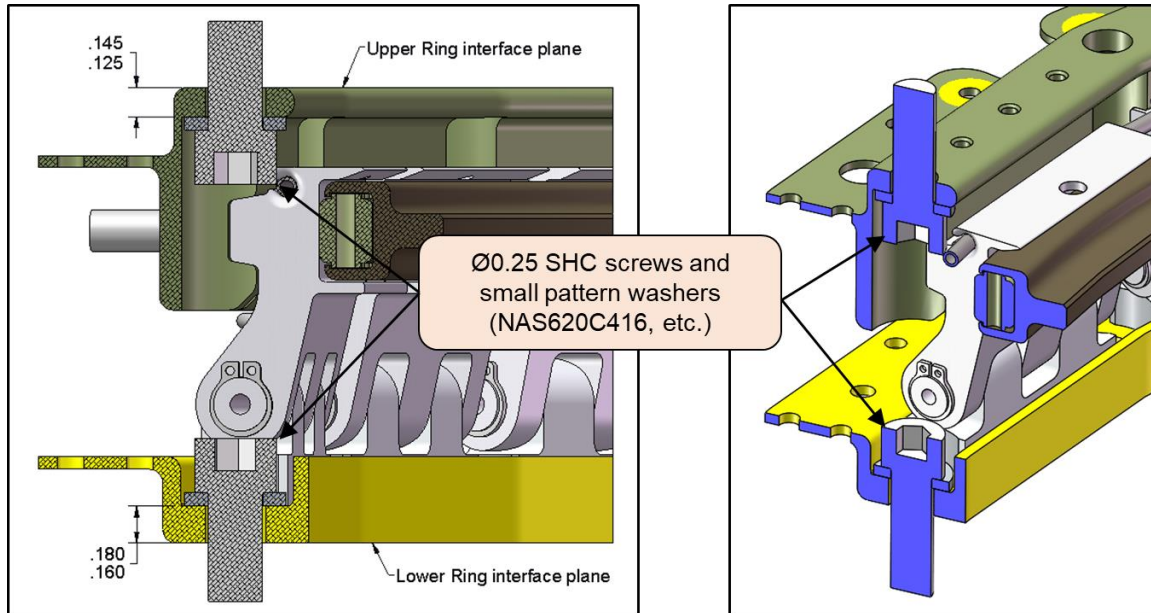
0.25 inch fasteners from MLB to adjoining structures
